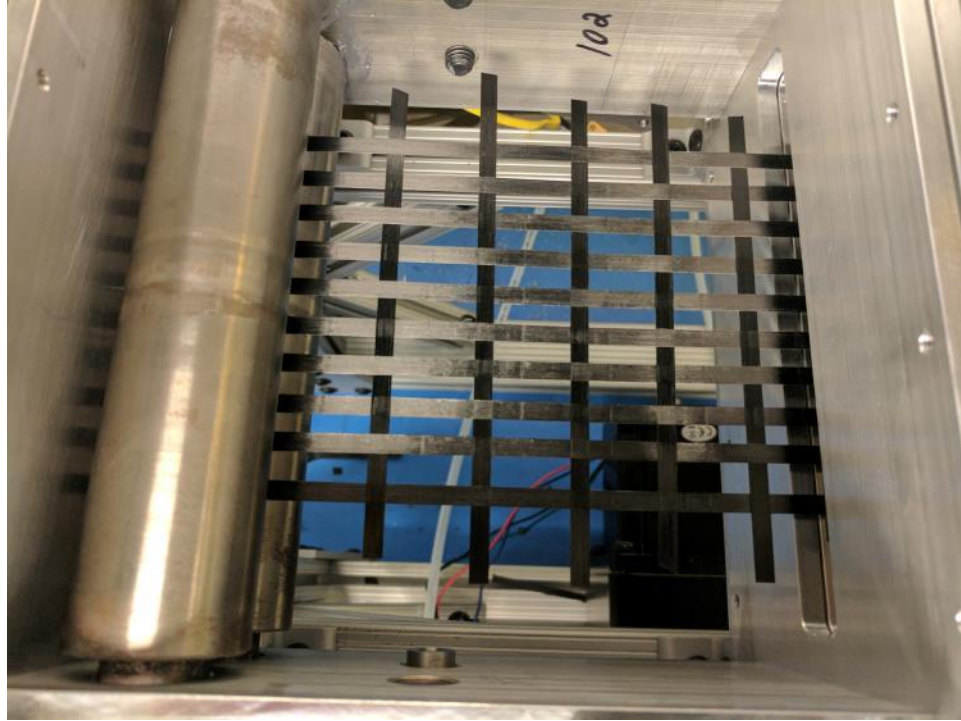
Composite lattice, exiting hot roller. Machine feed direction is from left to right.
